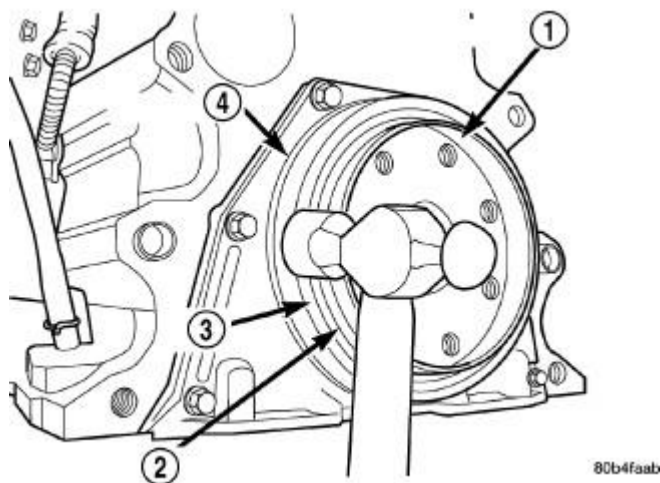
Installing Seal Using Alignment Tool and Hammer
